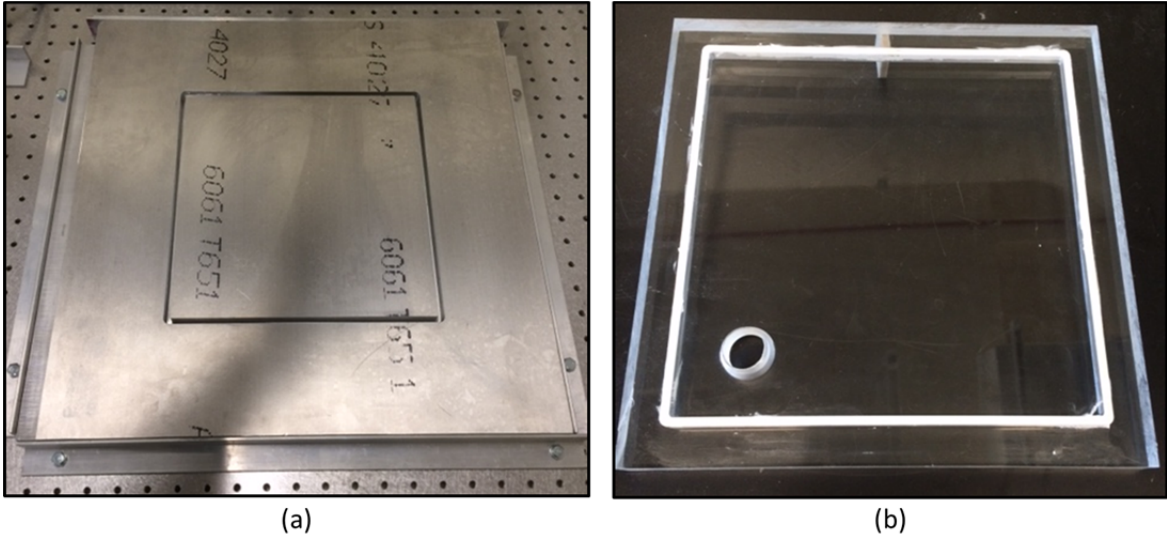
(a) Aluminum Bottom Plate and (b) PMMA Top Plate.
